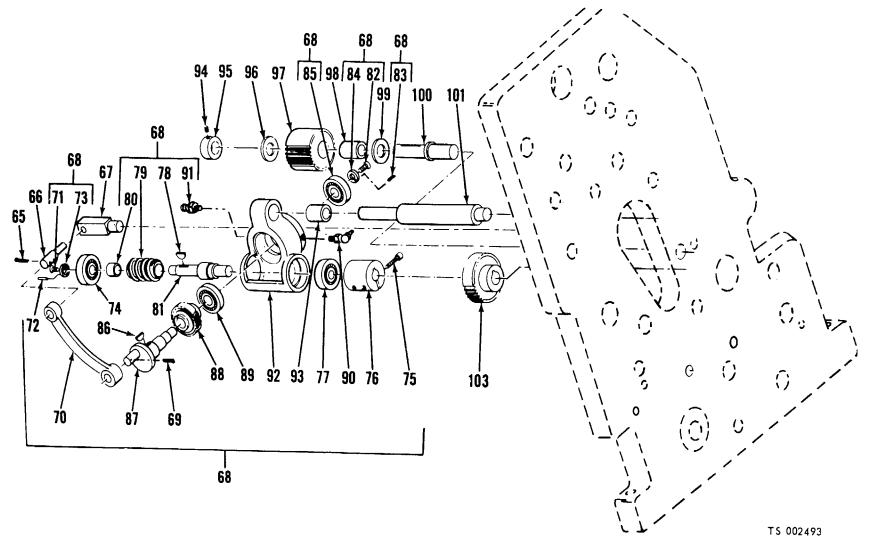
Water motion assembly (Sheet 4 of 6).
